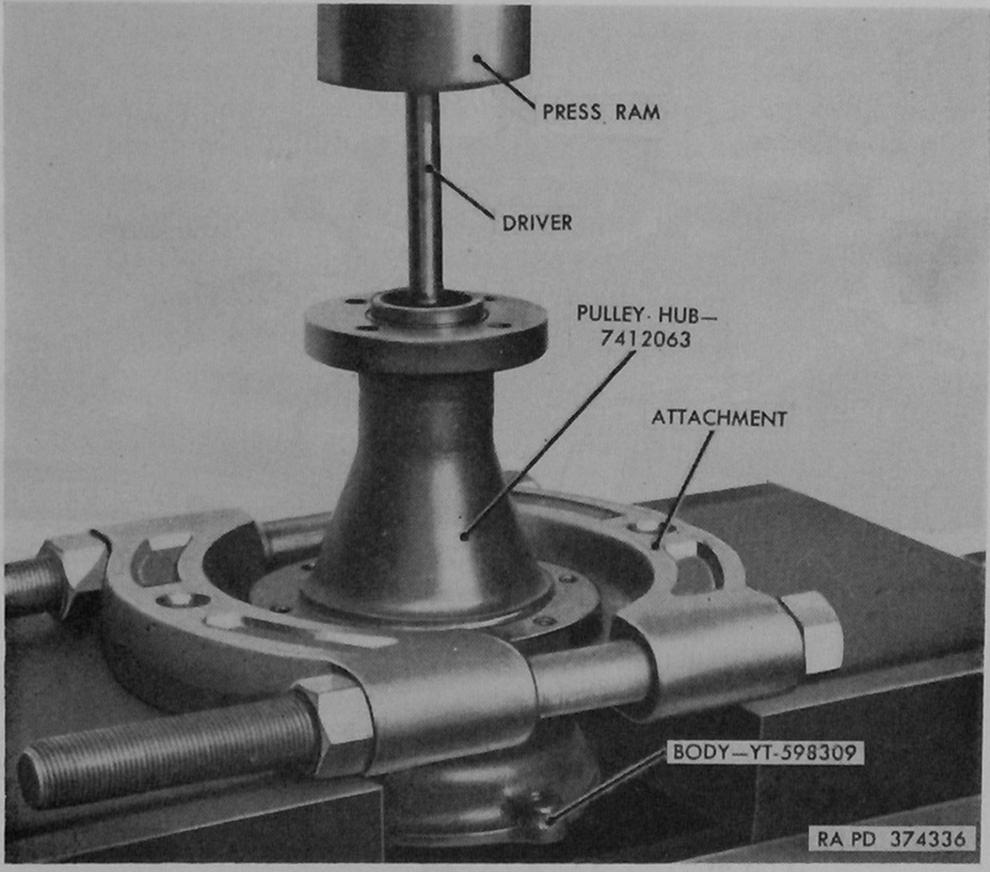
Removing water pump pulley hub—engine assembly 7411599.
